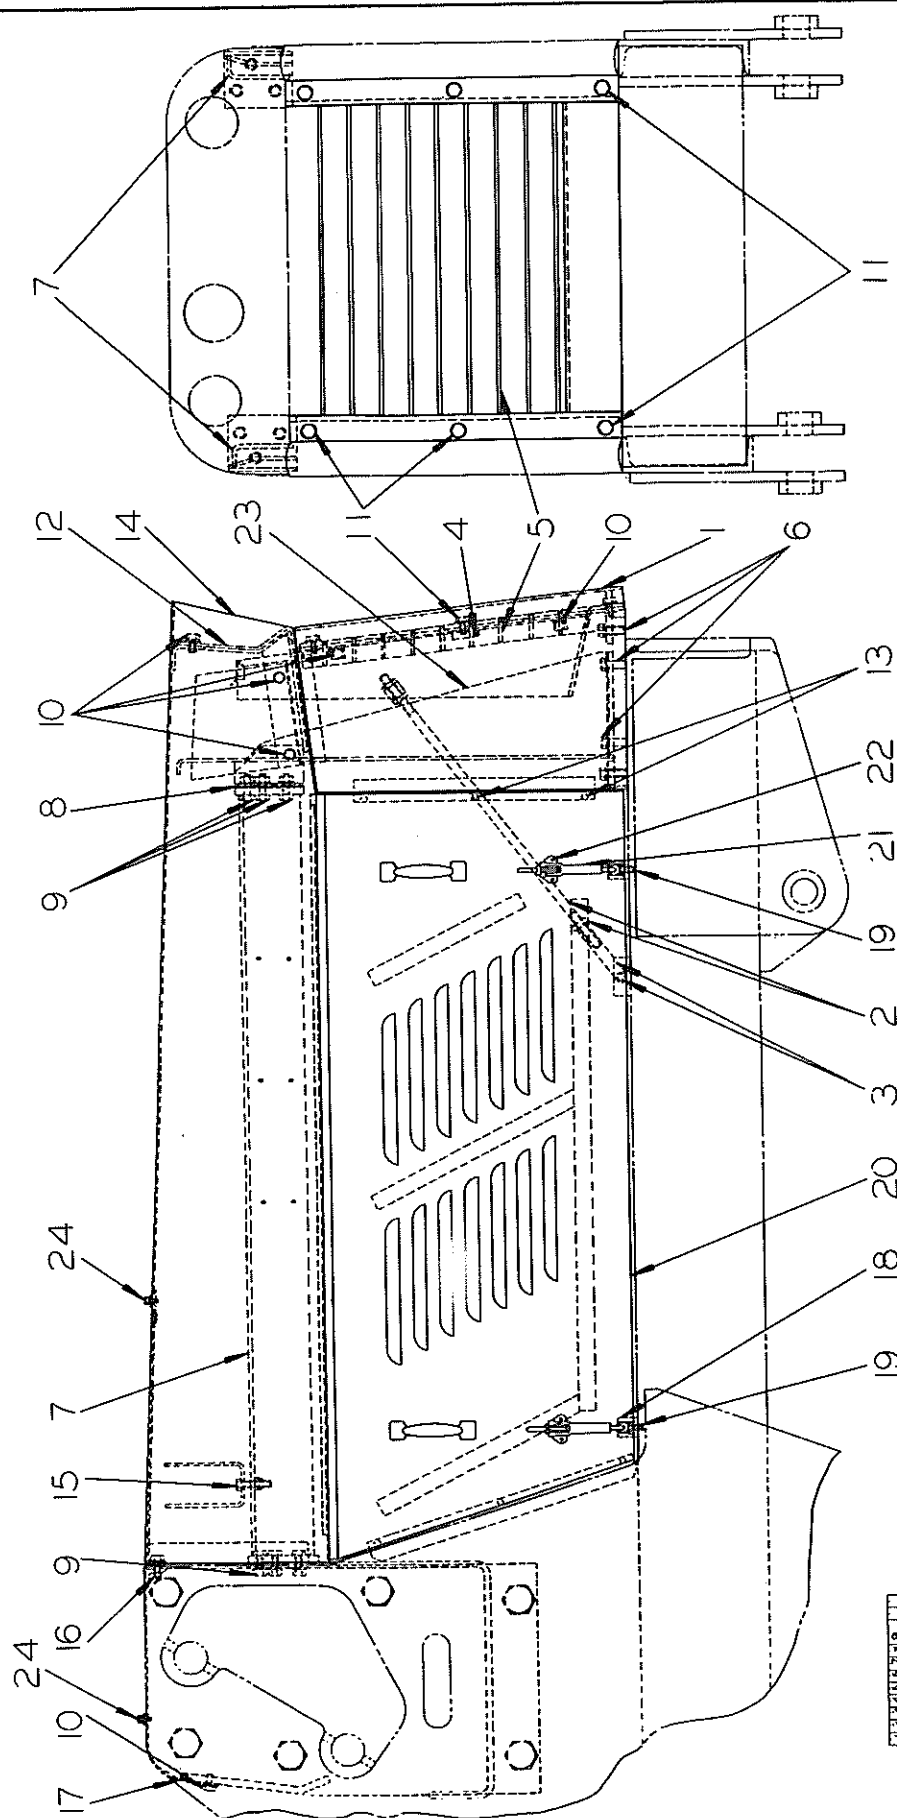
RADIATOR SHELL AND HOOD GROUP
